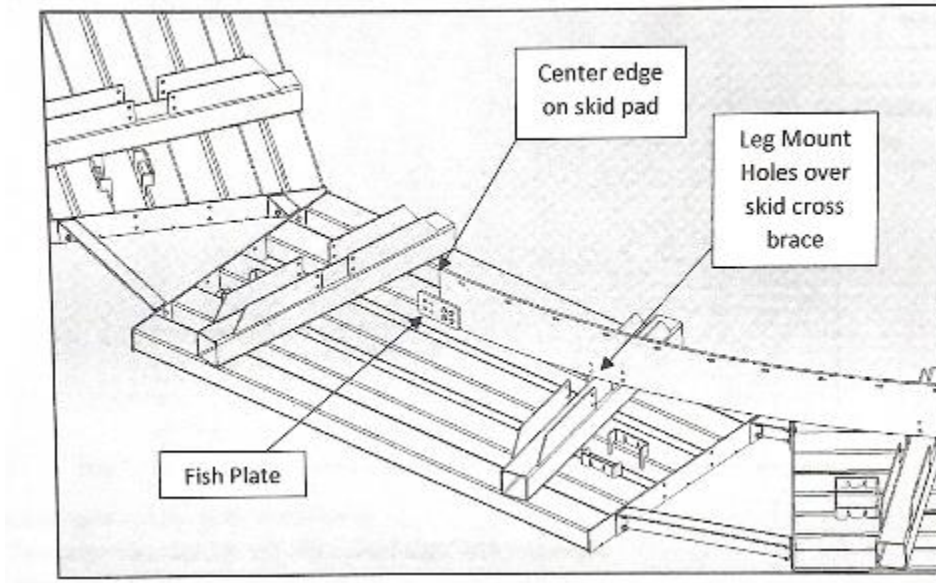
Attach fishplate to ring using supplied ½" bolts
